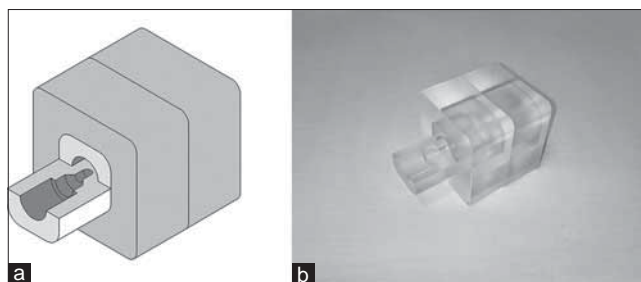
(a) 40 mm × 40 mm × 40 mm cuboid three dimensional model with detector insert and (b) the corresponding machined part
